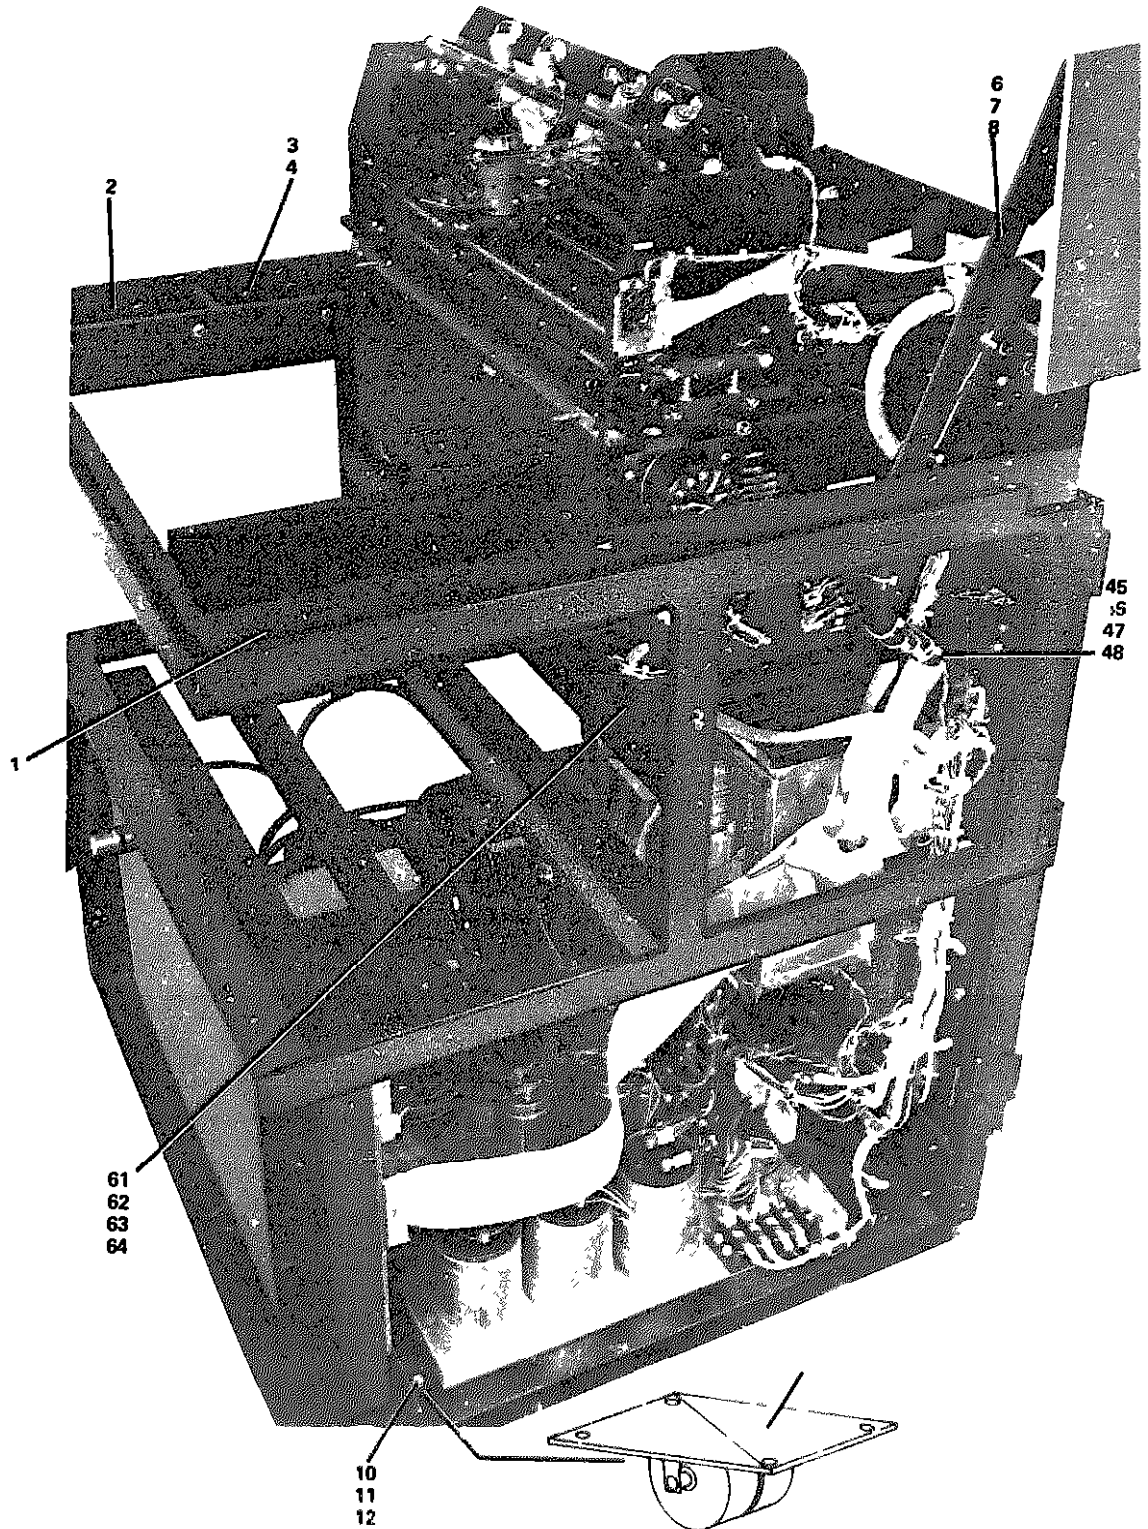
Cabinet Assembly Right Side 1A1 (Sheet 1 of 4)
